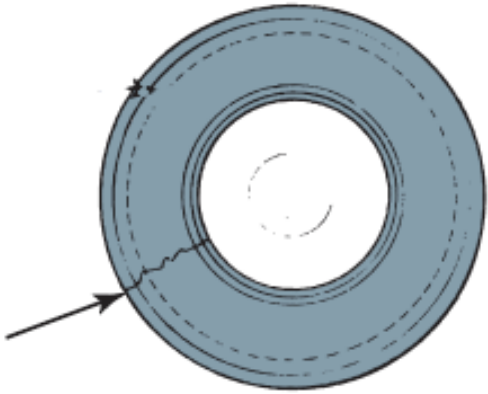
A cracked piston requires that the caliper be replaced.
